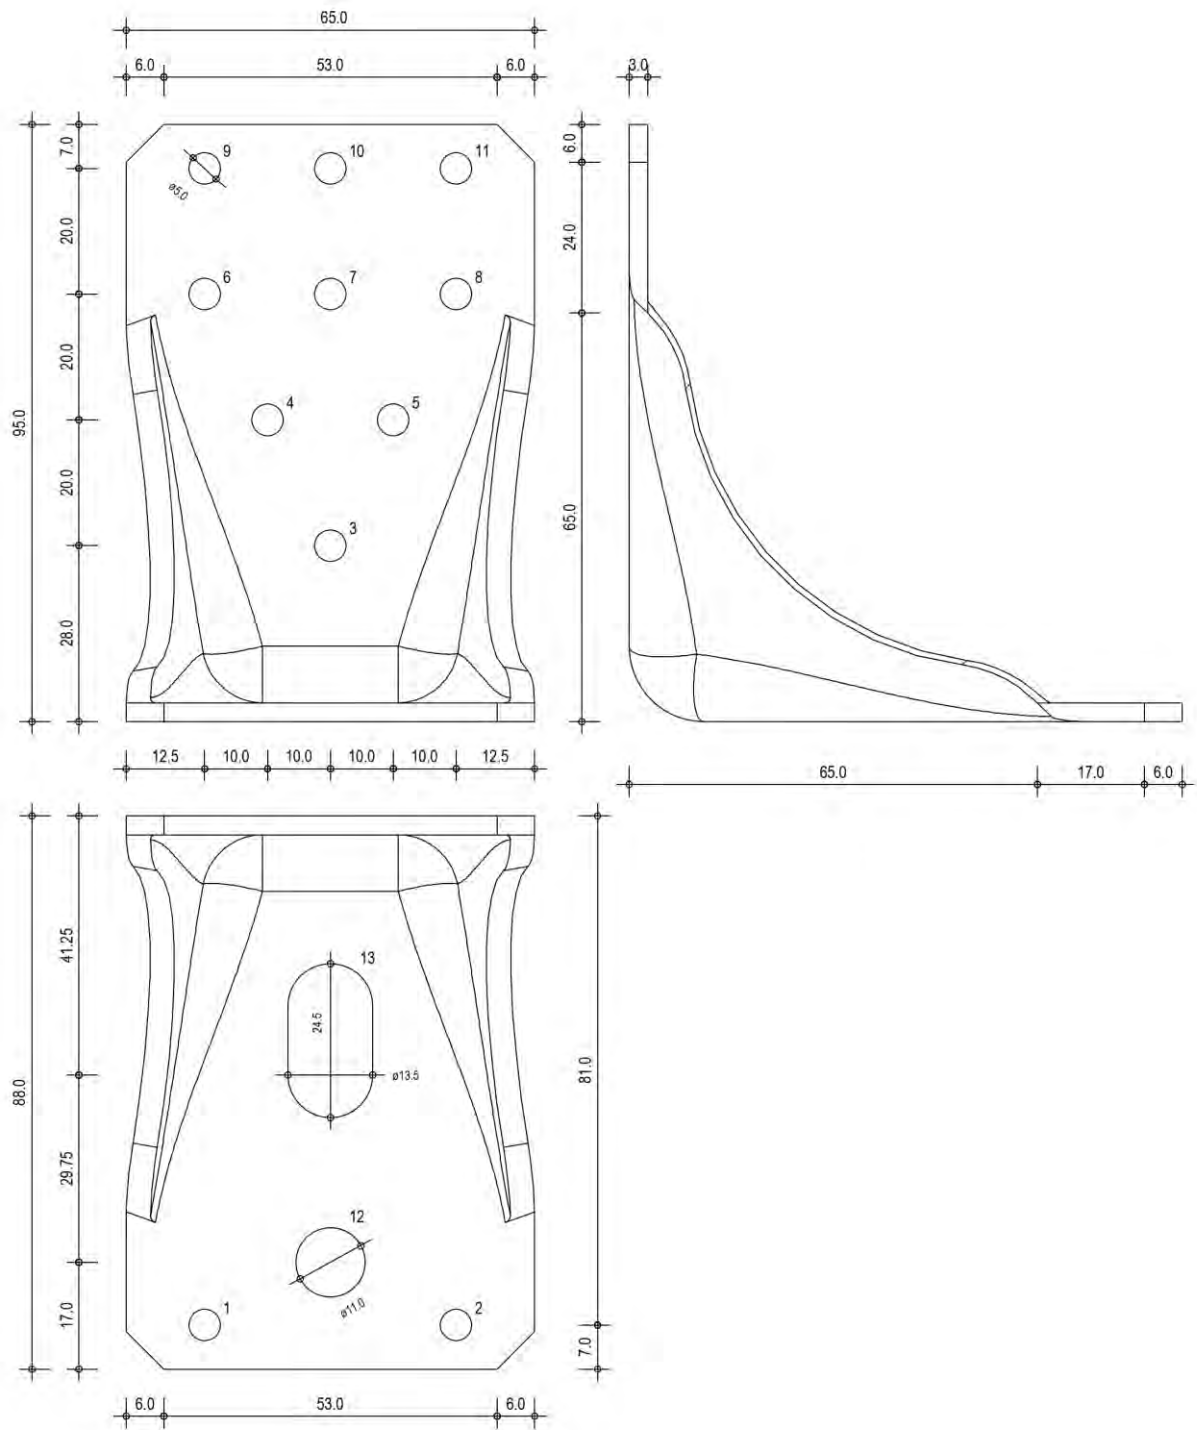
Dimensions of Angle Brackets 1101353 and 1121353
